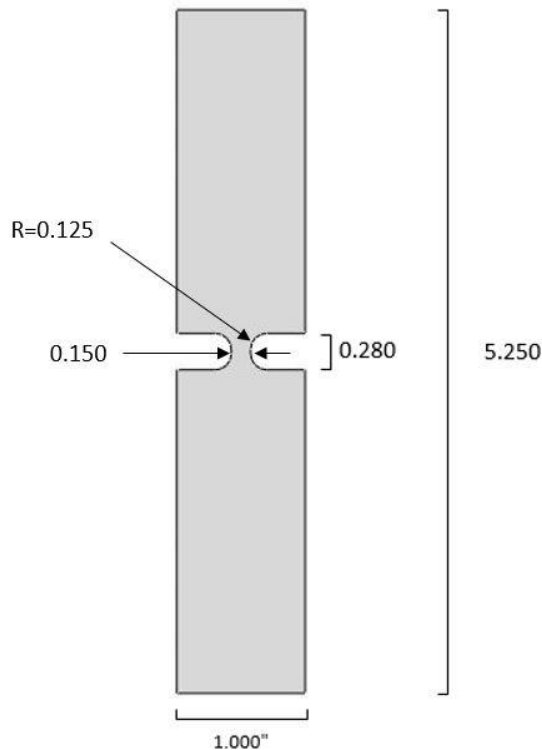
IPL coupon geometry for stainless steel. Drawing dimensions in inches.
